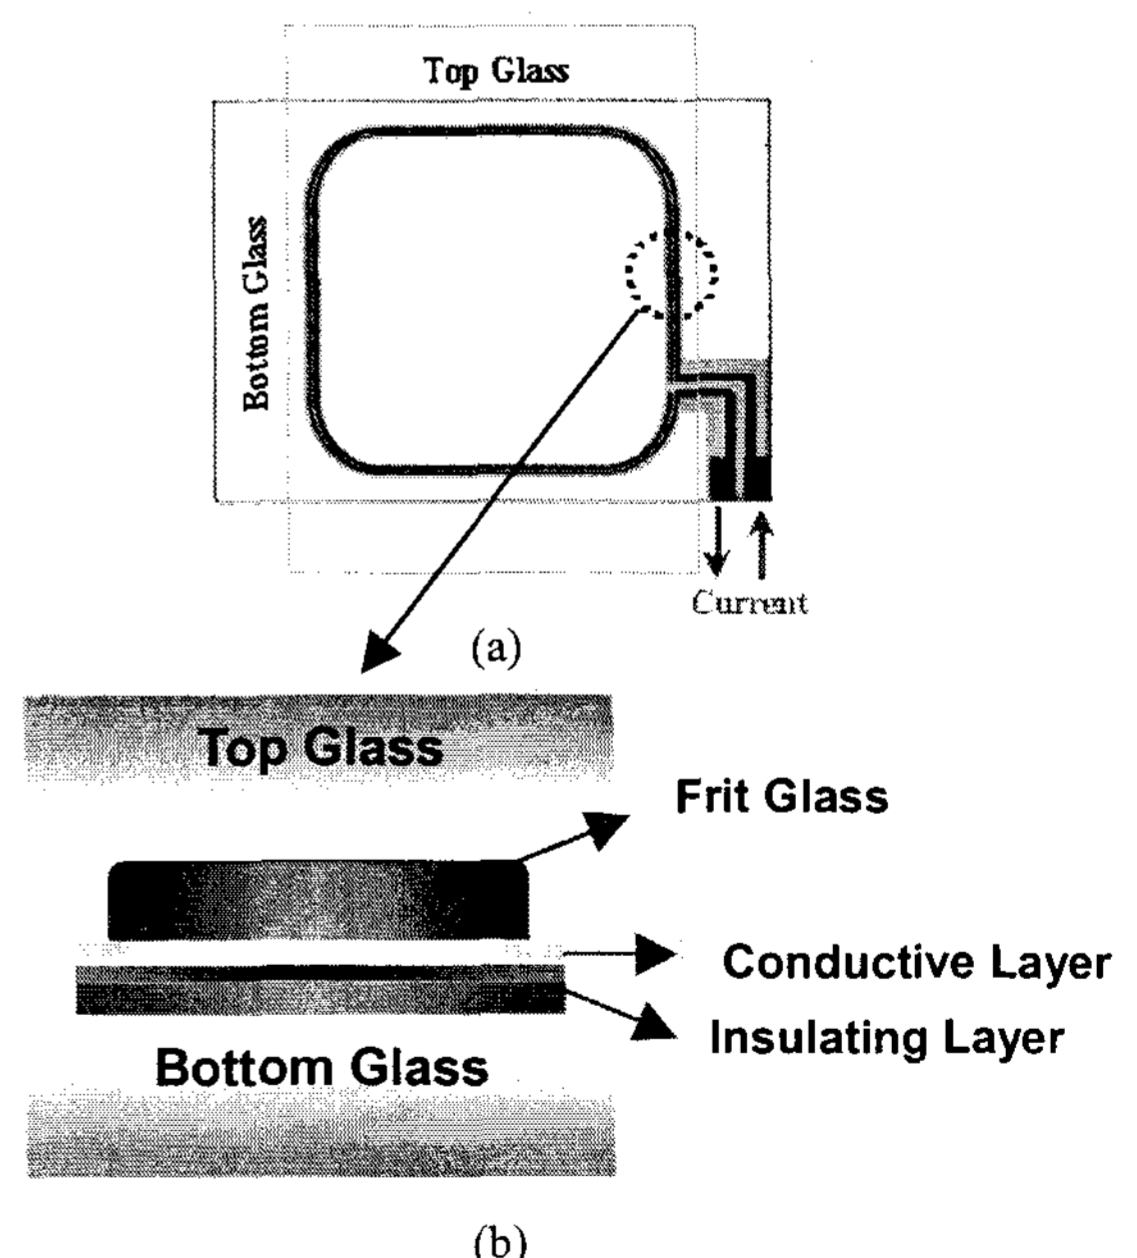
(a) Top view of screen-printed panel and (b) side view of detailed structure of frit sealed panel for the vacuum in-line sealing.
